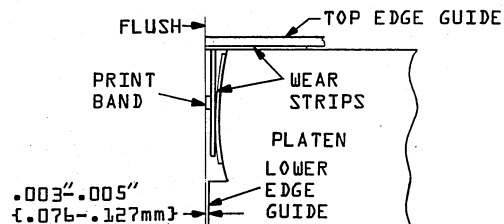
PLATEN WEAR STRIP CHECK (BEARING TAPE)
